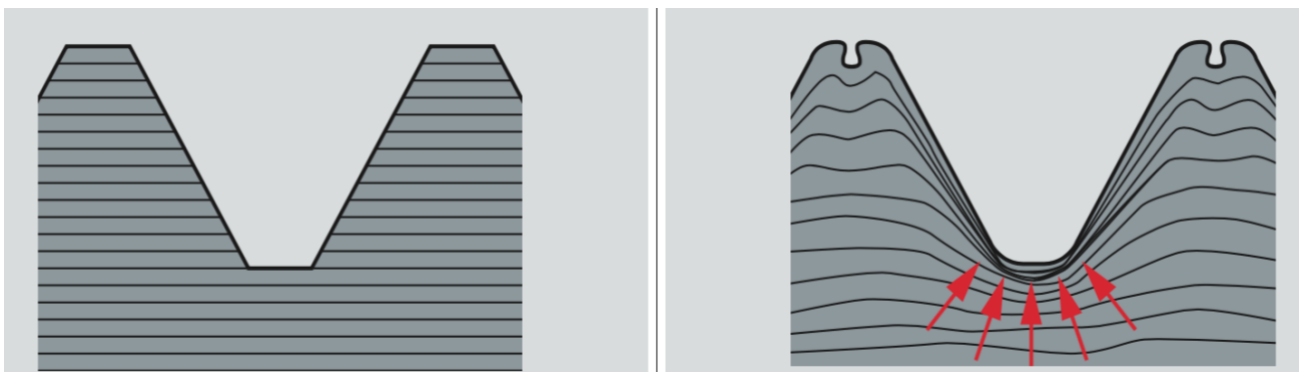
Difference Between Sharp Edge and Formed Edge of Thread [10]
